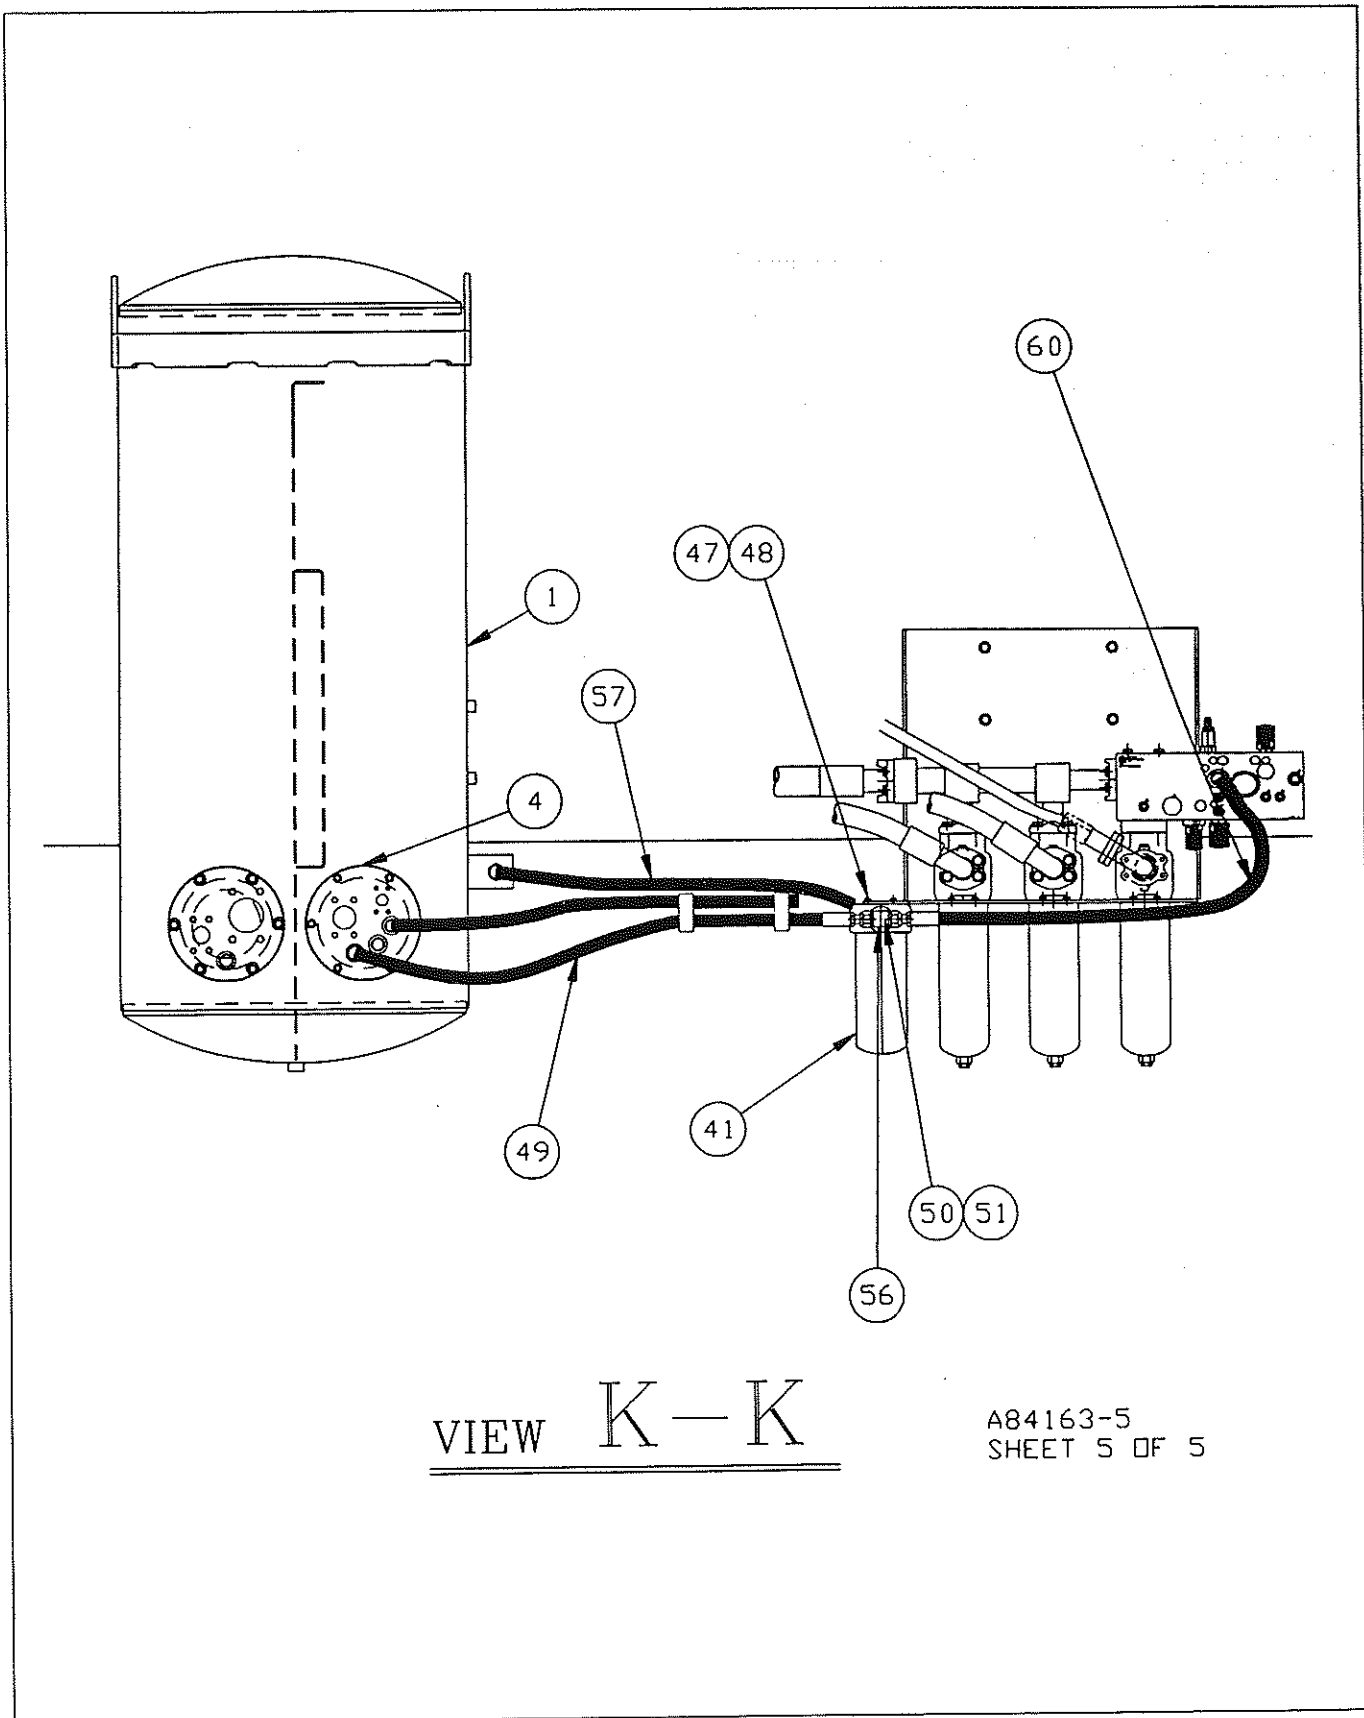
HYDRAULIC TANK ASSEMBLY - CONTINUED
